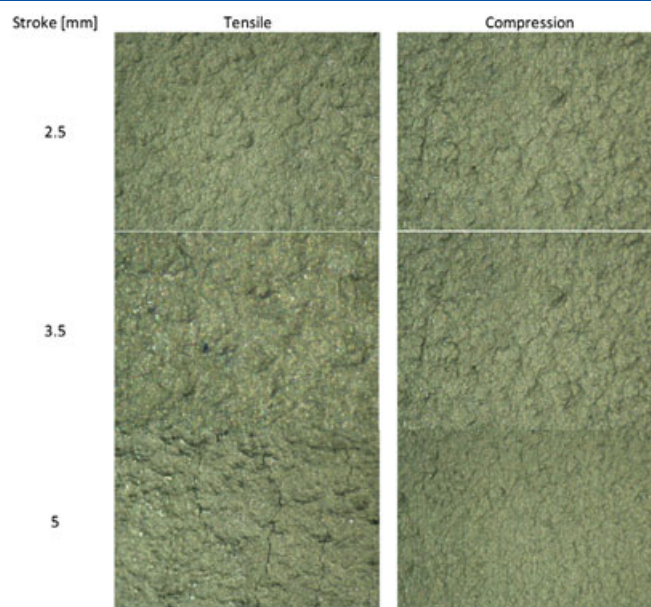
Surface of the cold-sprayed layer during the bending test in both tensile and compressive conditions.
